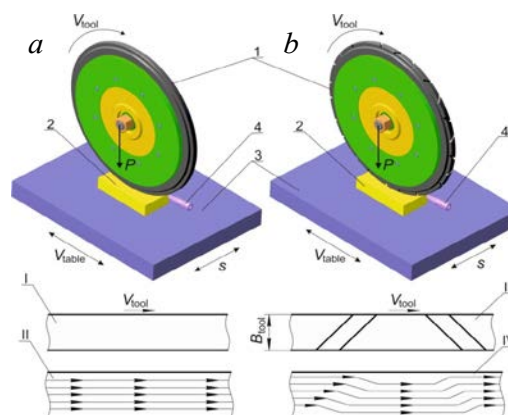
Scheme of MPT of flat specimens by strengthening tools with smooth working surface (a) and with oppositely directed grooves (b): 1 – tool; 2 – specimen; 3 – table of surface grinding machine; 4 – nozzle for supplying technological environment; (I, III) – working cross-sections and (II, IV) – directions of shear deformations of both tools. V_{tool} is linear speed of strengthening tool, V_{table} – is speed of machine tool's table, f and B_{tool} are transverse feed and width of working part of strengthening tool, respectively.
